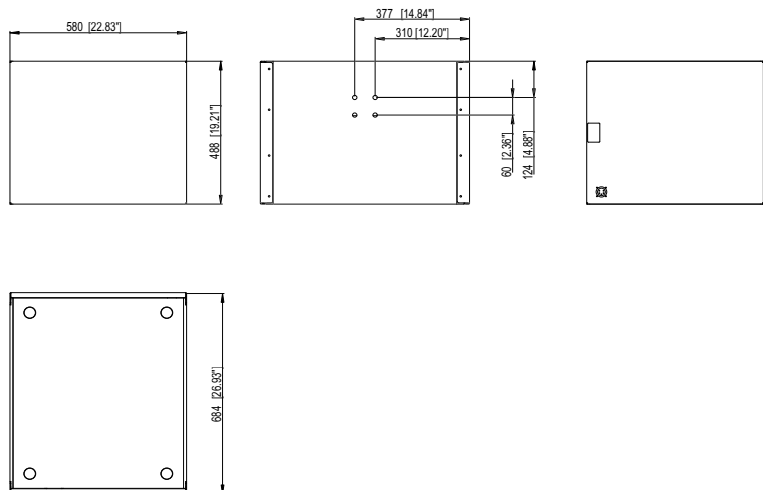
QiCSA-SUB cabinet dimensions in mm [inch]
